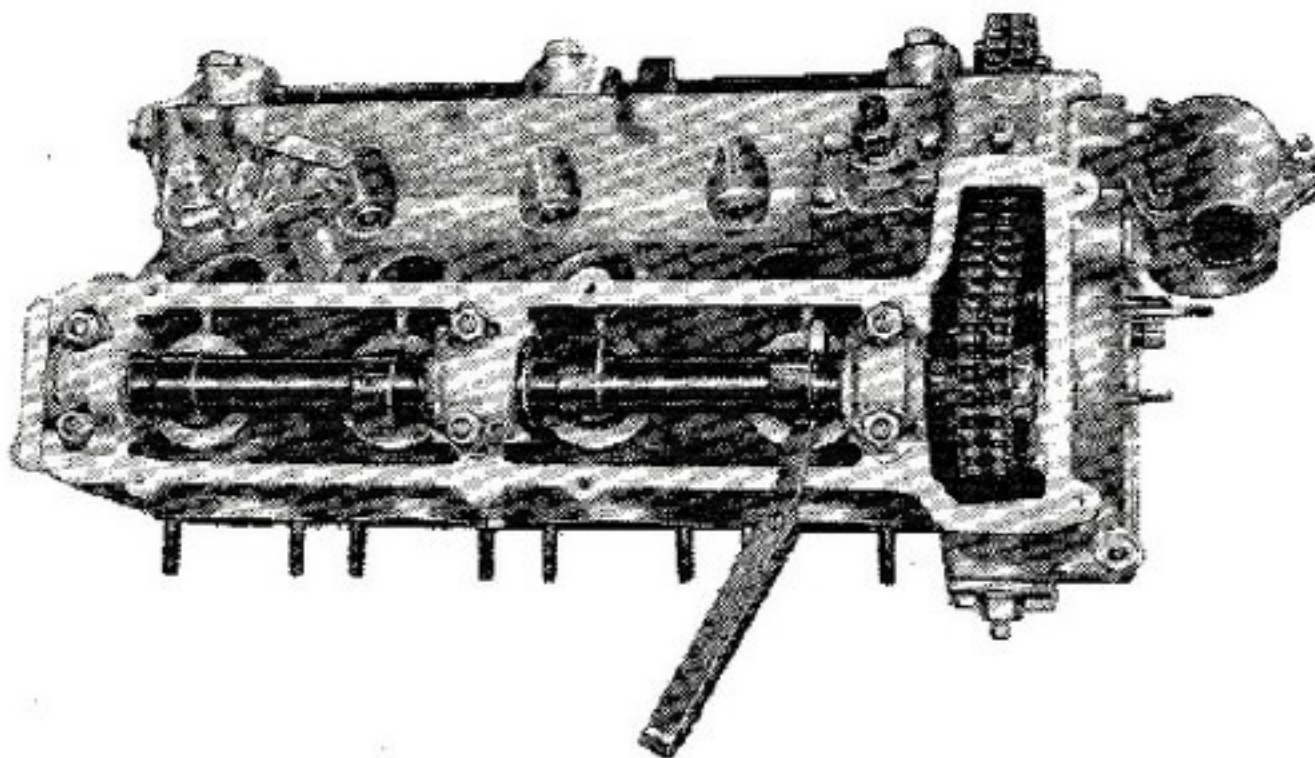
Checking valve clearance with feeler gauge C 315.
